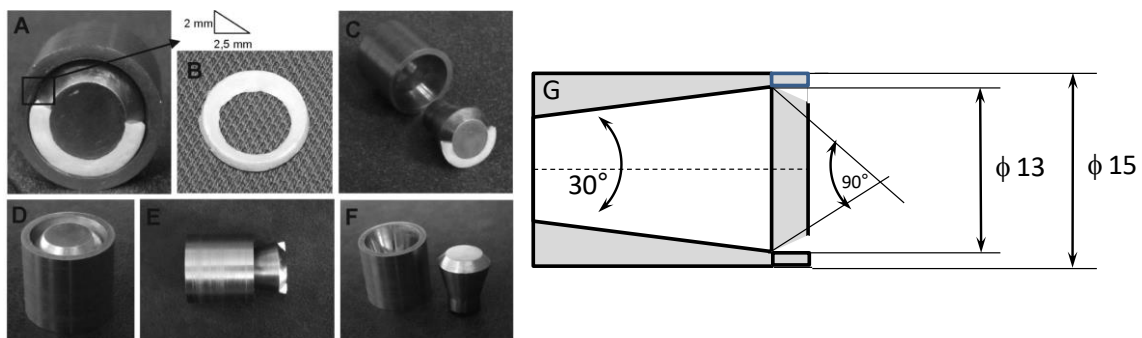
Open stainless steel ring mould designed in order to achieve cement rings with high-level accuracy (size and contact surface). A: the outer and inner parts of the mold placed one on top of the other, indicating the surfaces forming the cement ring; B: a cast cement ring; C, D, E, F: the external and internal elements of the mold from different points of view; G: technical drawing of the mold
